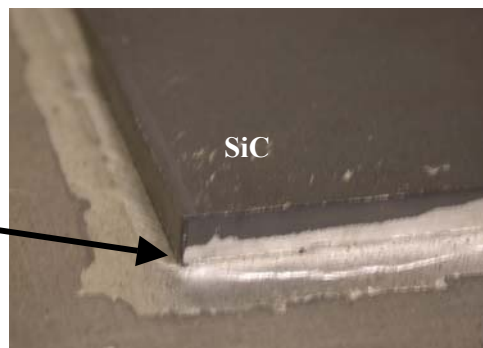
SiC plate corner fillet detail, bonded with S-Bond™ Alloy 220.
